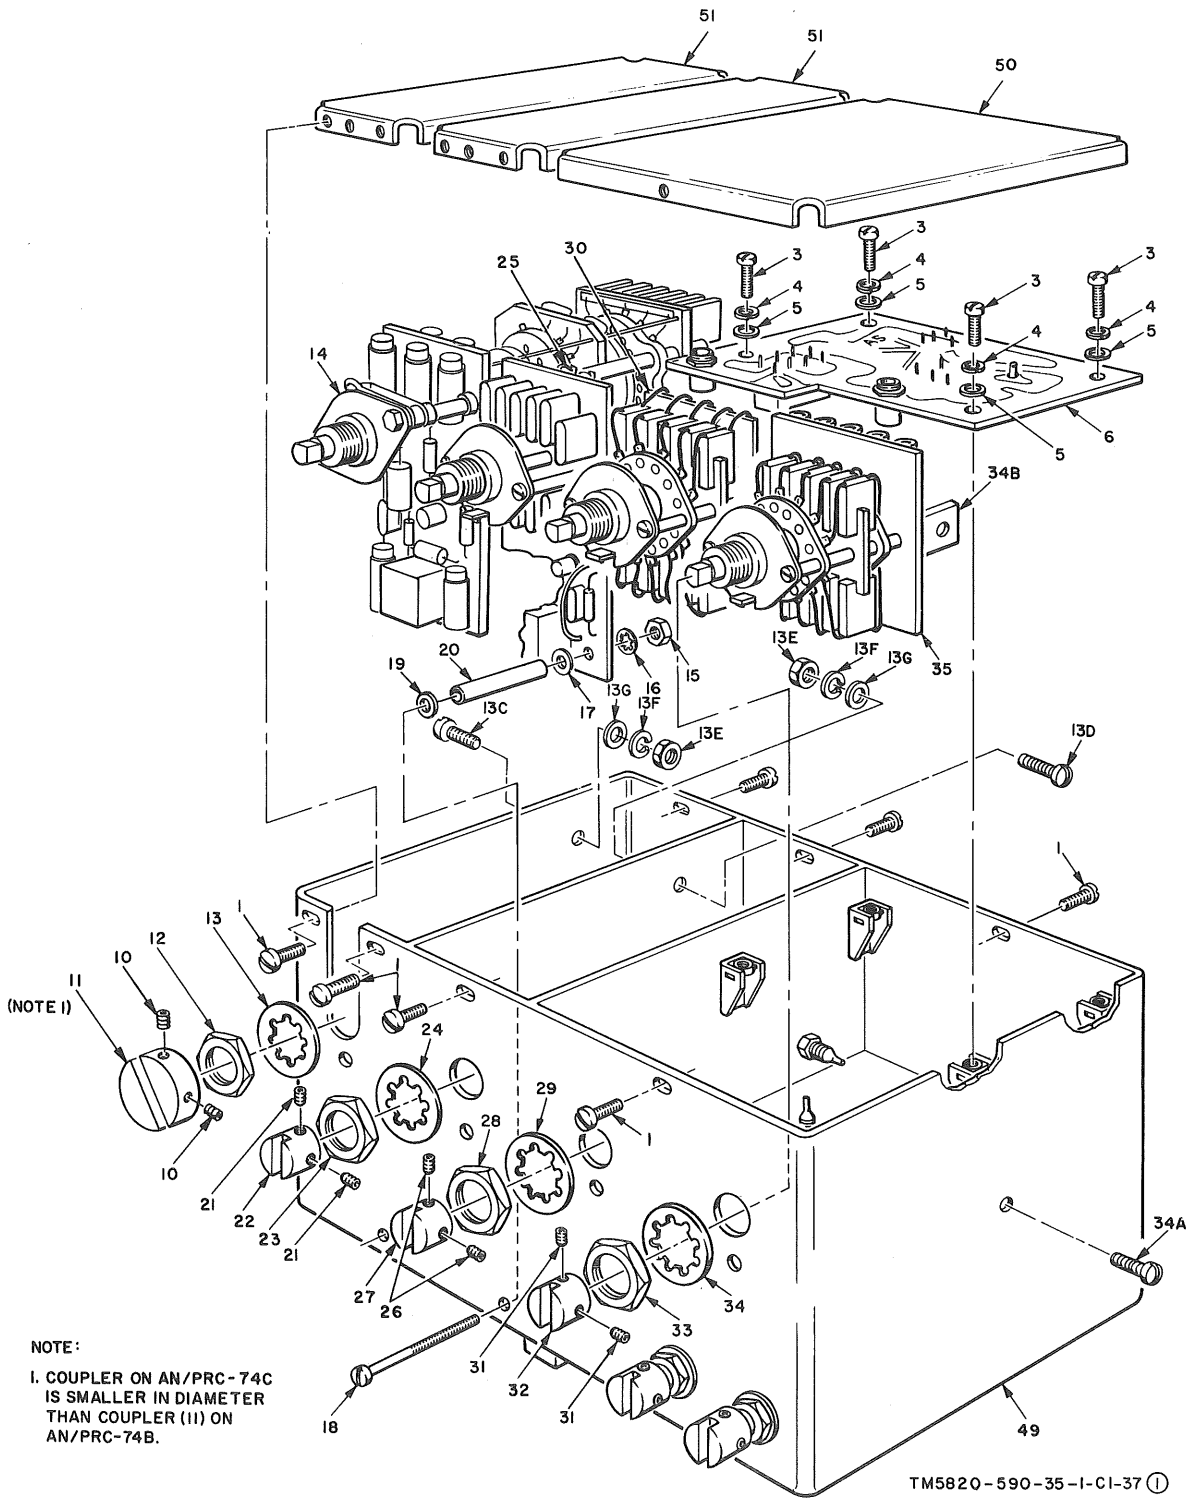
①. Frequency synthesizer module, exploded view (part 1 of 2).
